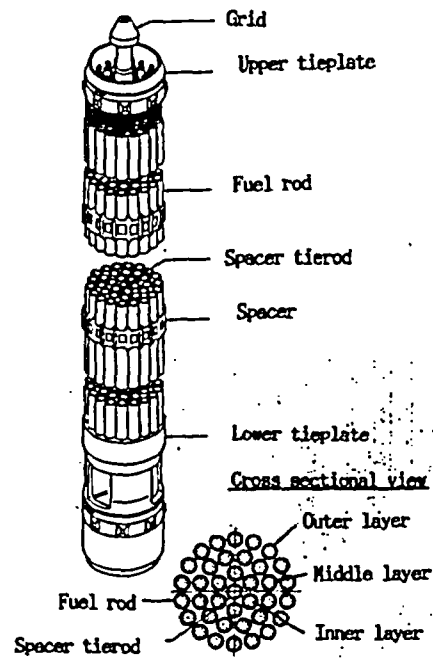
View of the fuel assembly(36-rod cluster type)
